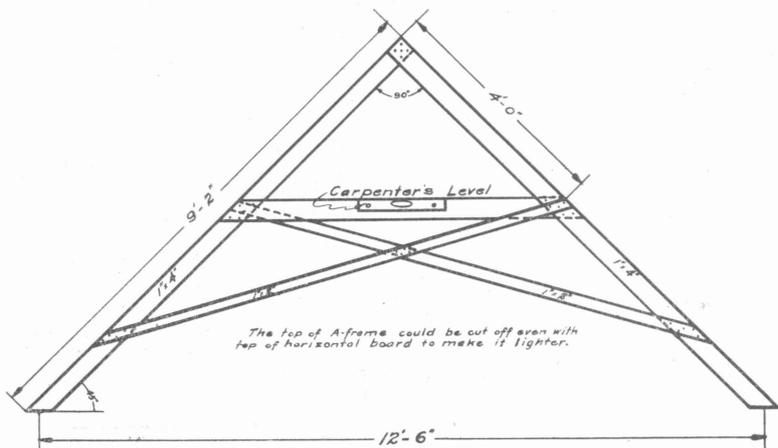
Drawing showing details of construction of A-frame terracing level.
